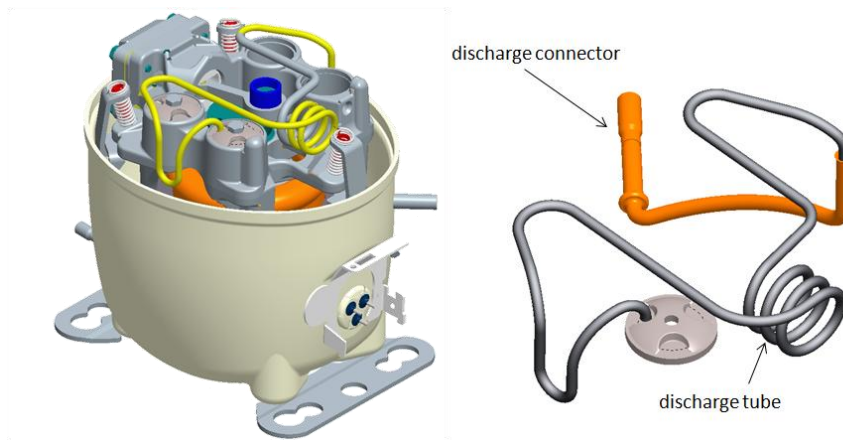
The discharge tube system assembled on the compressor (left) and the discharge tube system in details (right)
